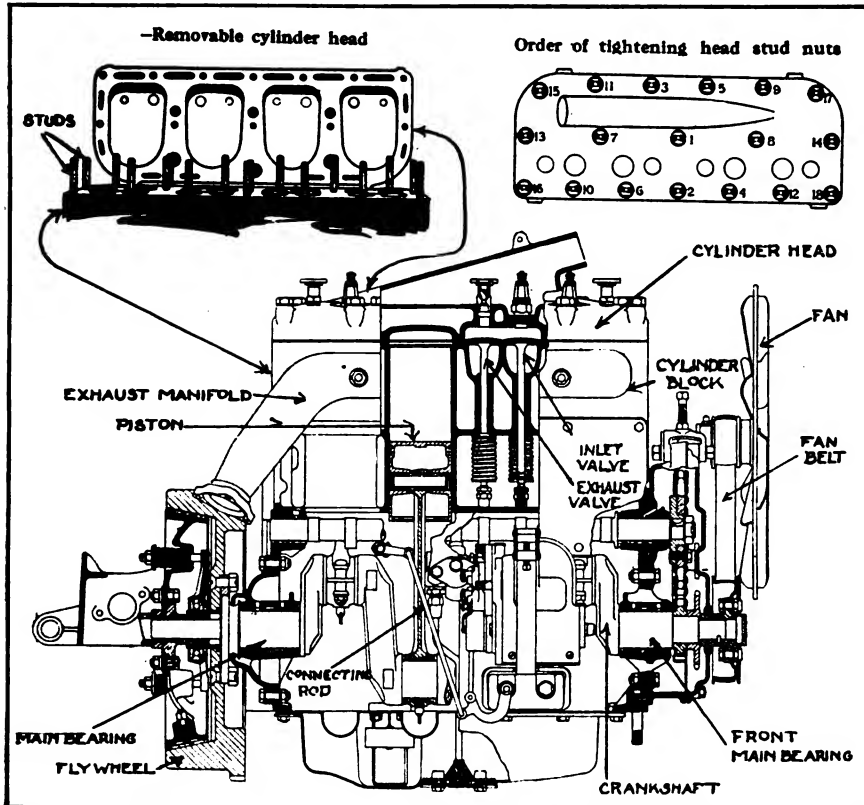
OVERLAND ENGINE HAS REMOVABLE CYLINDER HEAD PERMITTING EASY REMOVAL OF CARBON DEPOSIT
